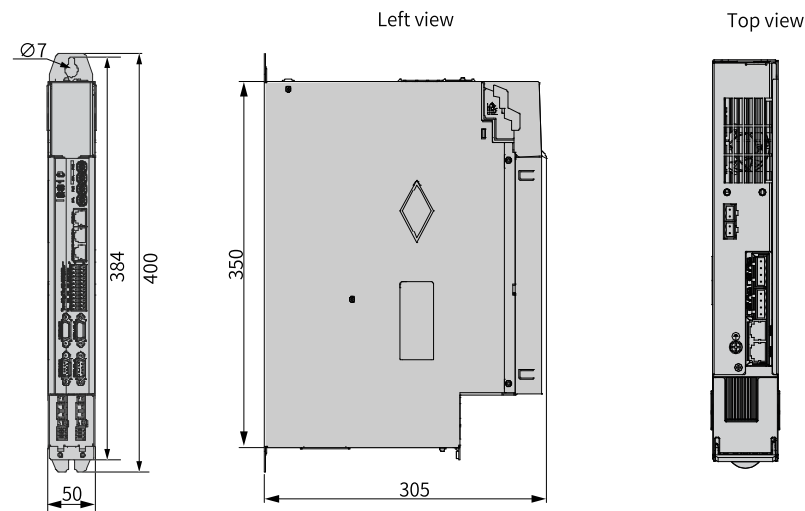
Outline dimensions of the size-1 (unit: mm)
